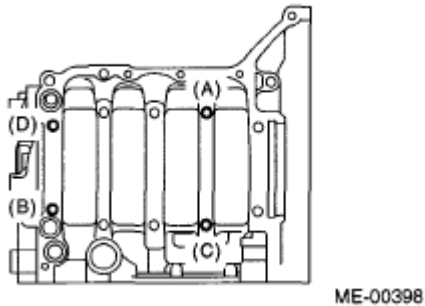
Identifying Tightening Sequence Of Cylinder Block Connecting Bolts
